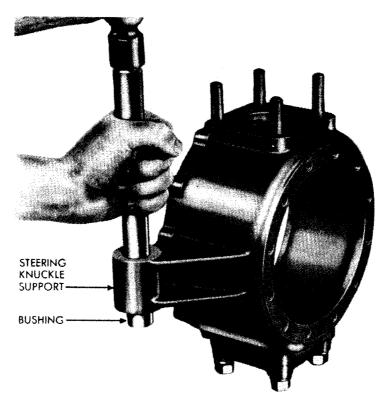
Steering Knuckle Support Bushing Removal (Remover and Replacer 41-R-2389-40)
